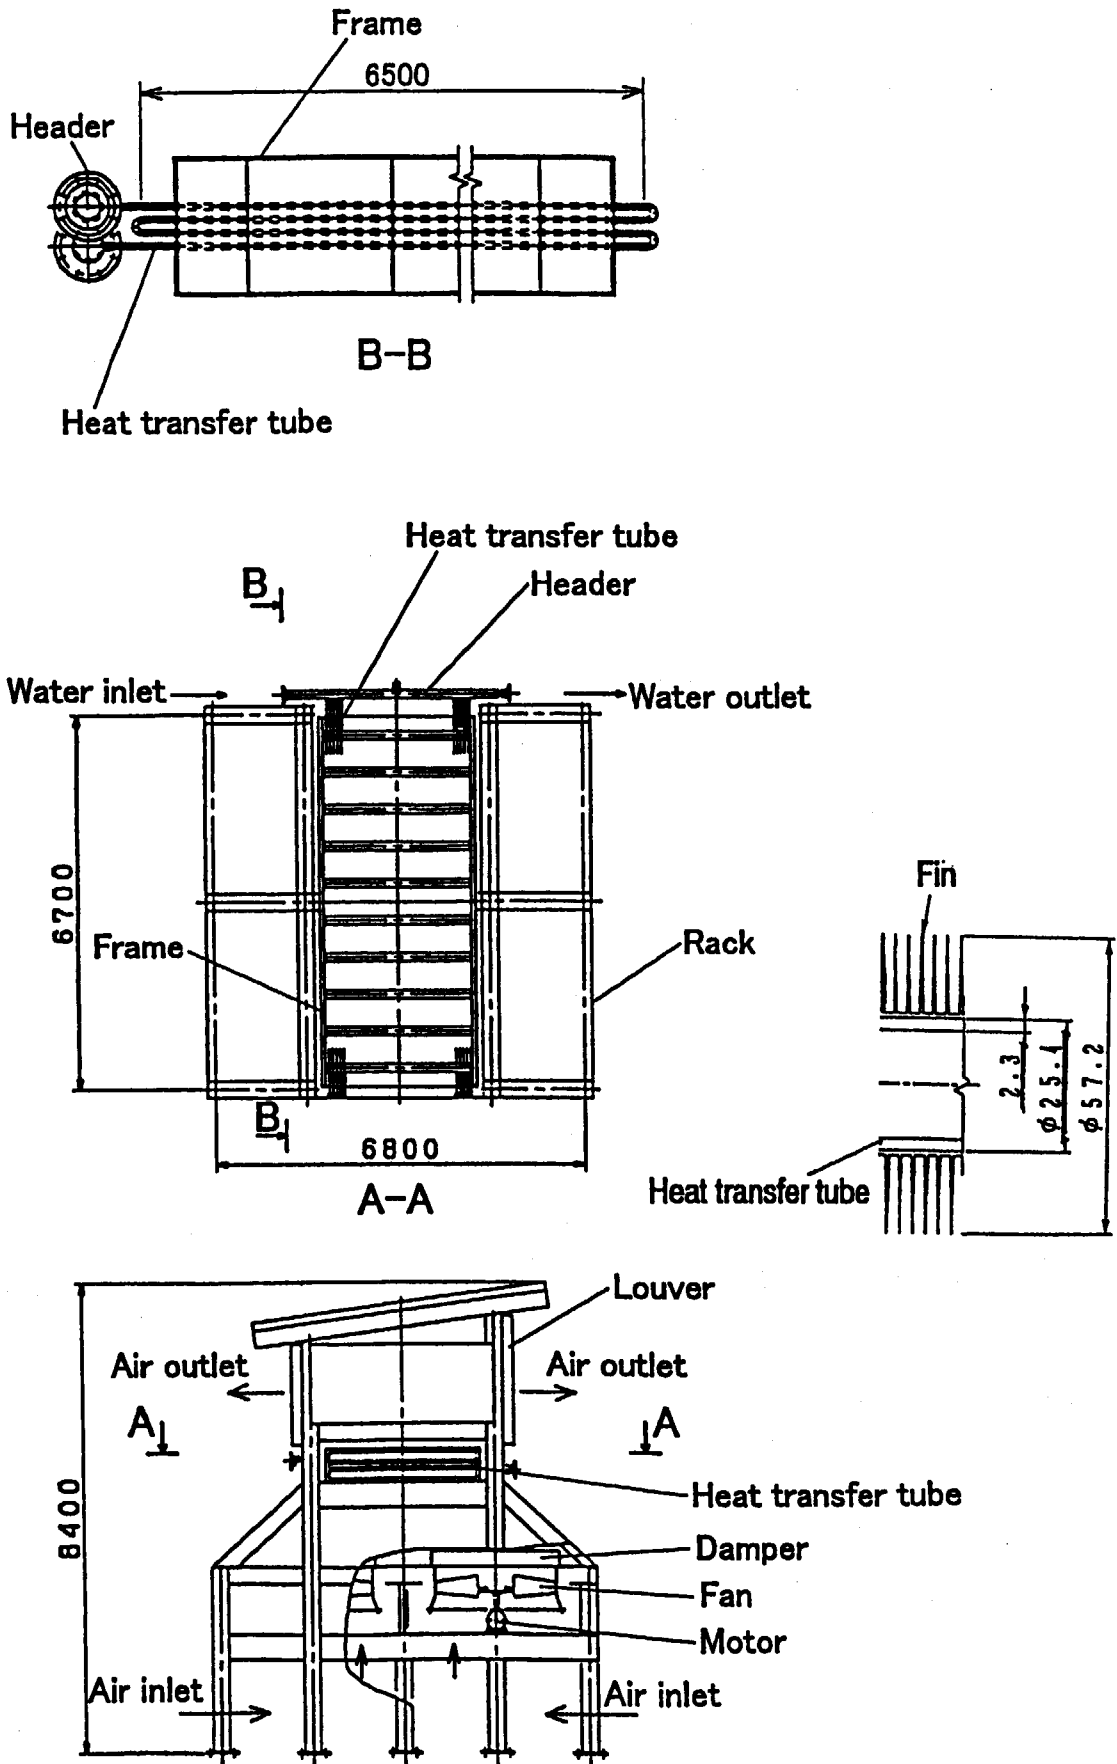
Structural drawing of air cooler for auxiliary cooling system
